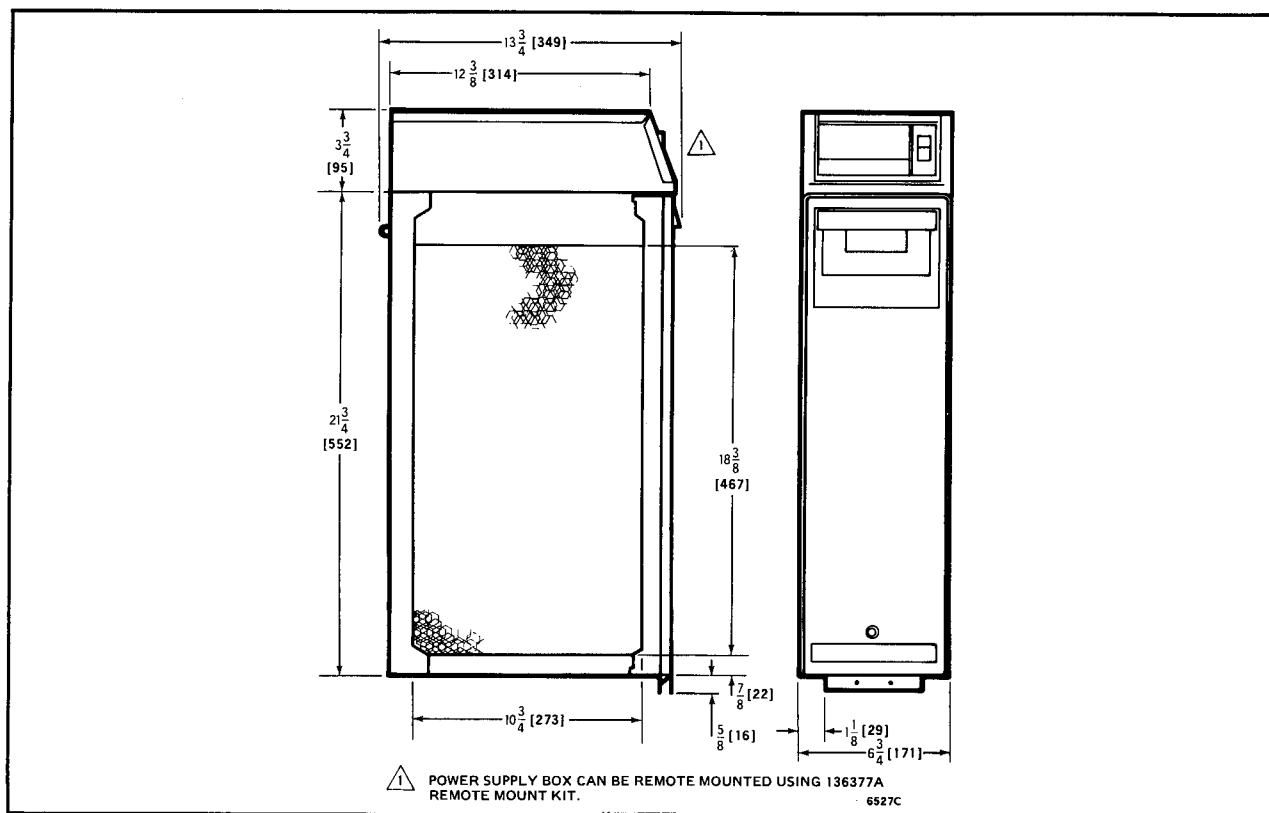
INSTALLATION DIMENSIONS IN in. [mm IN BRACKETS] OF 1-CELL ELECTRONIC AIR CLEANER.
